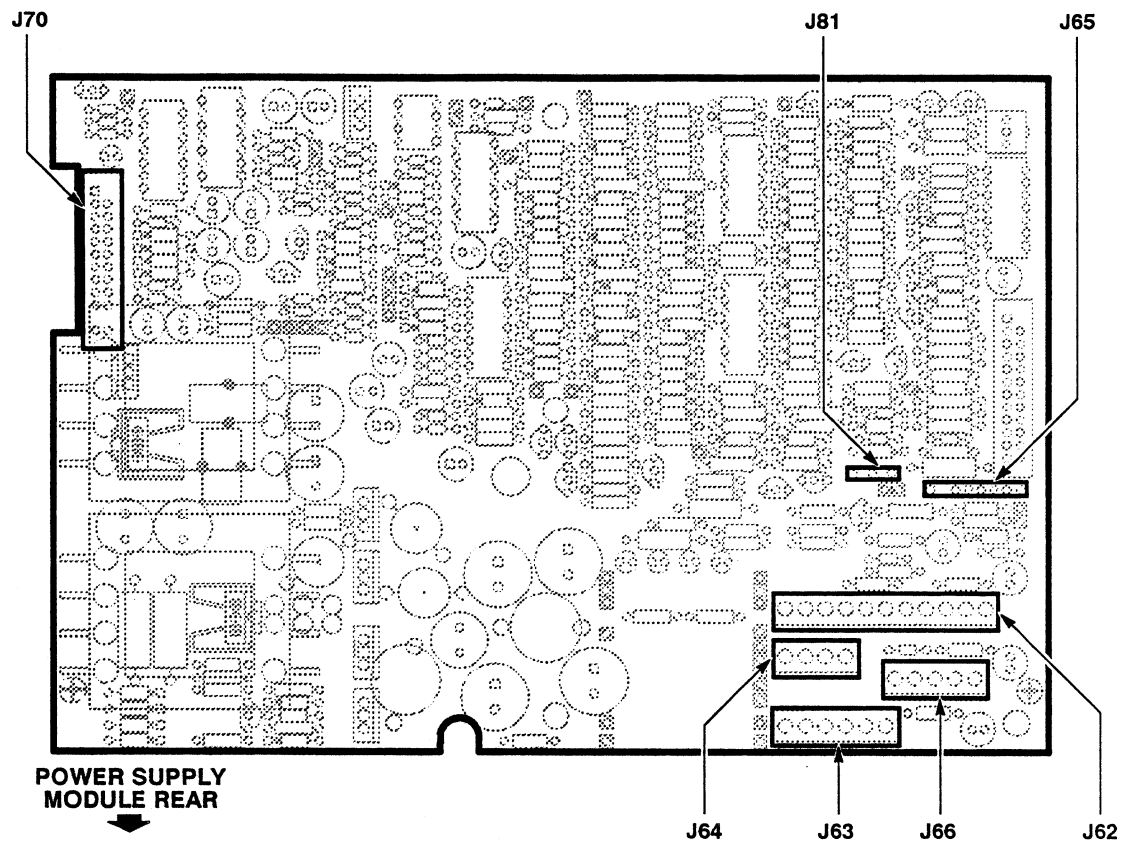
A2A2 Control Rectifier Board Connector Locations
